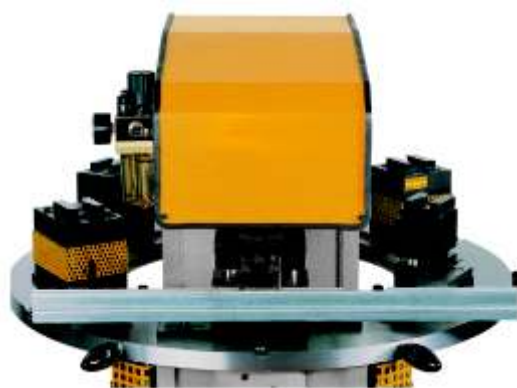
R Multiple punching unit with a tooling plate for 6 tools
